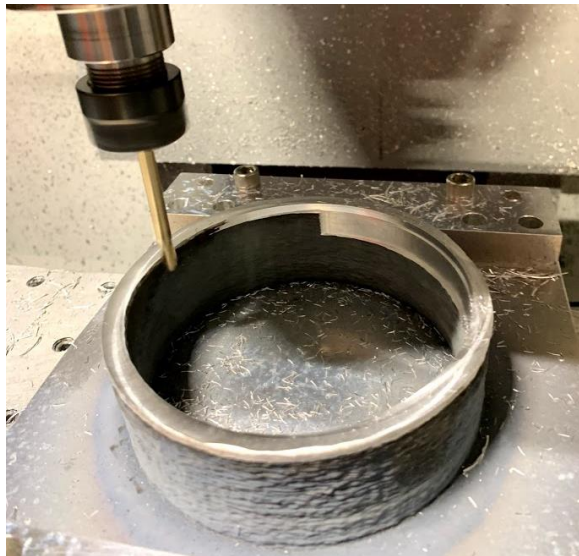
Printing and machining from the same locating feature. Note the part shift and uneven machined surface.
